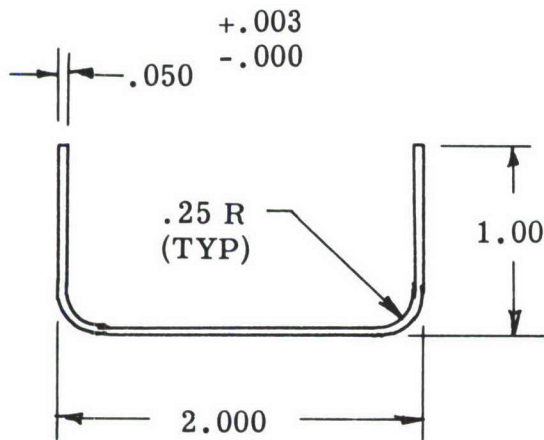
ASSEMBLY "PANEL" 1 EA. REQ. FS & MS
